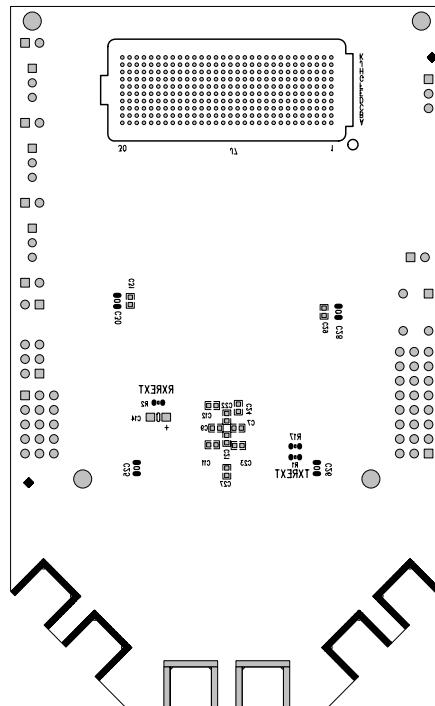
Si5100-EVB Solder Side Assembly (Daughter Card)
